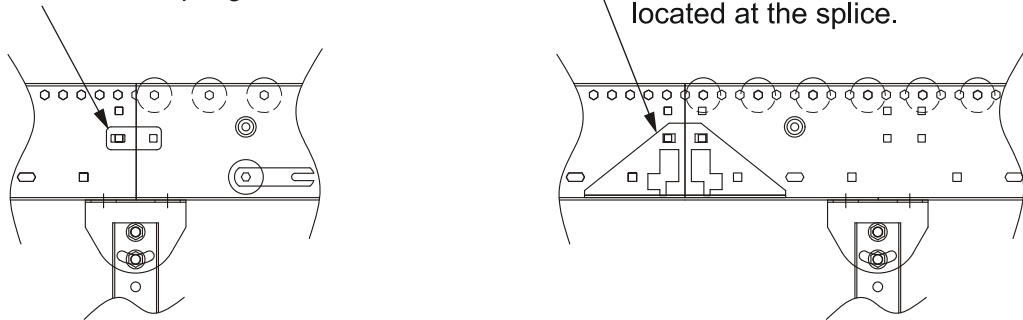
Connecting/Supporting Adjoining Intermediate Sections
